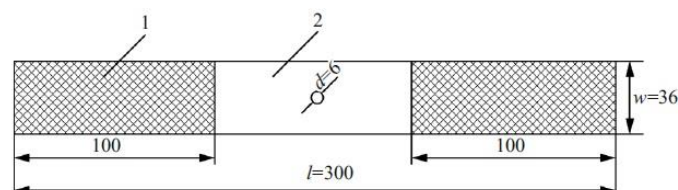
Test specimen: 1 — gripping region and 2 — gage section. Dimension in mm [38]
